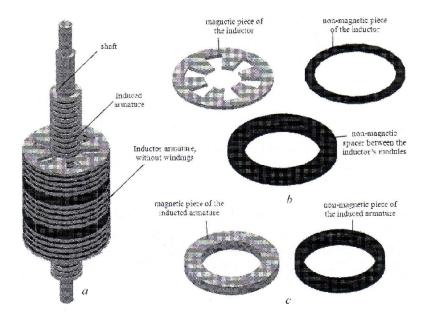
Tubular transverse flux reluctance machine: a – the structure; b – component parts of the inductor; c – component parts of the induced armature.
